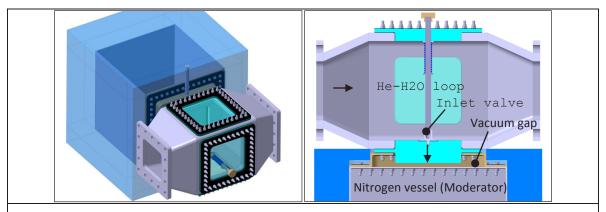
He leak detection test setup, left isometric CAD view, right CAD sectional view
